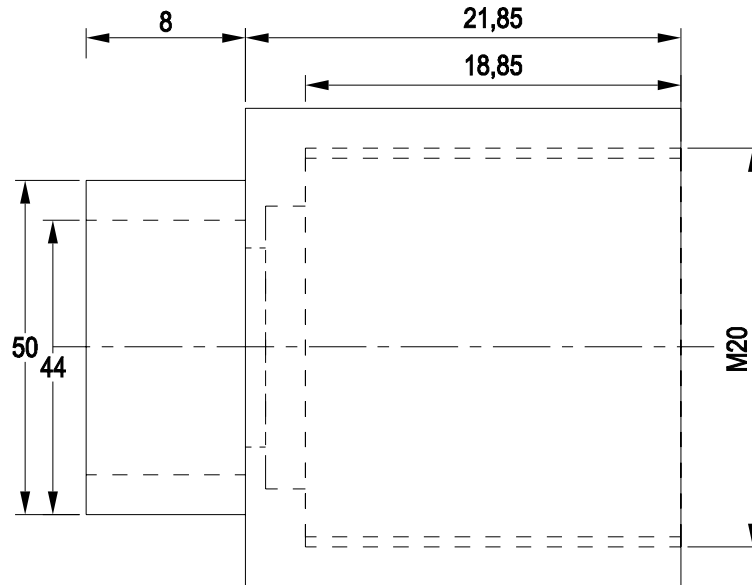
Holder of the primary nozzle with main dimensions (all dimensions in mm).
